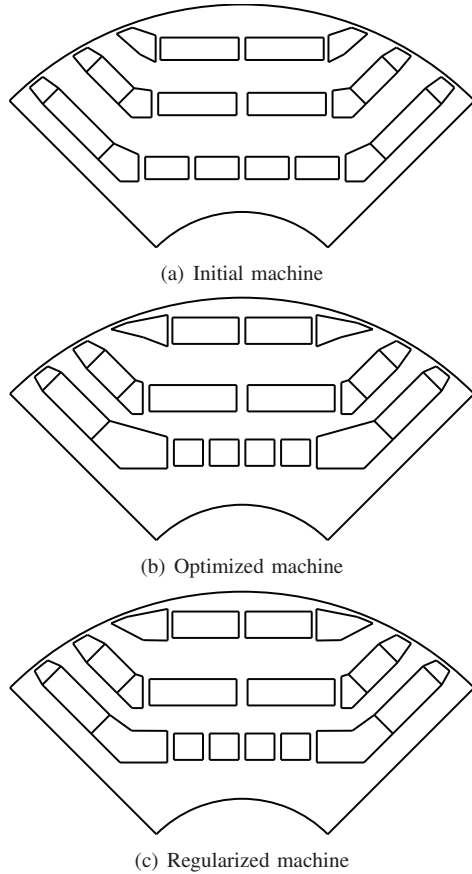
Rotor geometry for the initial machine (a), the optimize machine (b) and the regularized machine (c)
